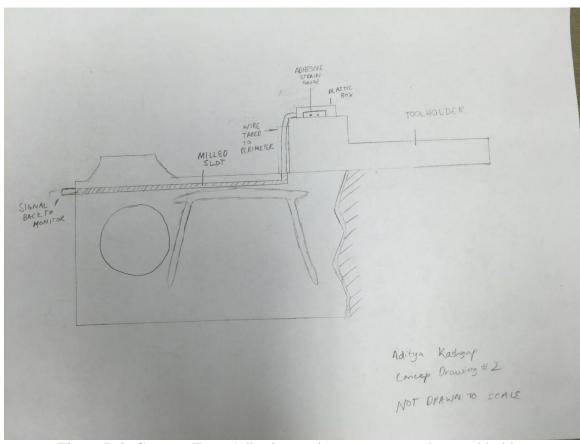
Concept Two: Adhesive strain gauge mounted on tool holder
